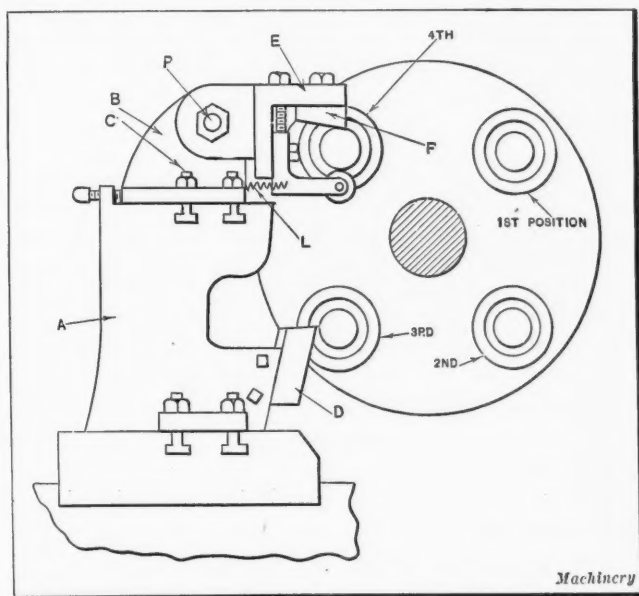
Double-deck Tool-holder used on Gridley Automatics
